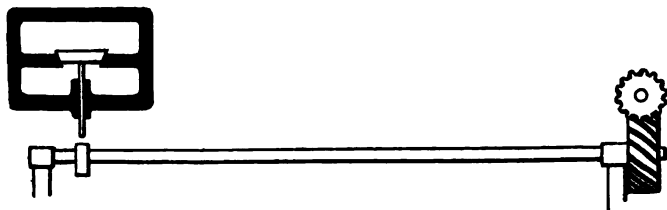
VALVES OPERATED BY SPIRAL GEARING.
